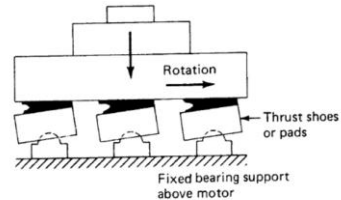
Basic principle of a pivoted-pad thrust bearing in top end of vertical pump motor. Dark areas are oil-film wedges that sustain thrust. Heavy arrow shows direction of downward thrust load.
